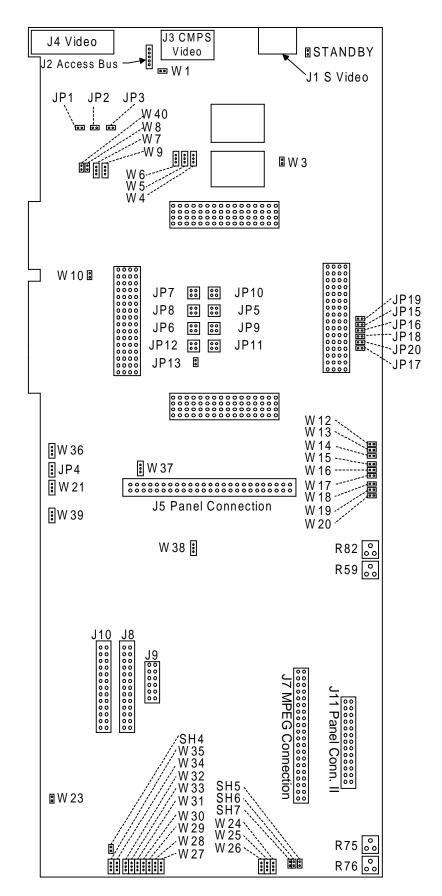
DKHiQV-PCI (Rev. A) Board Jumper Location
